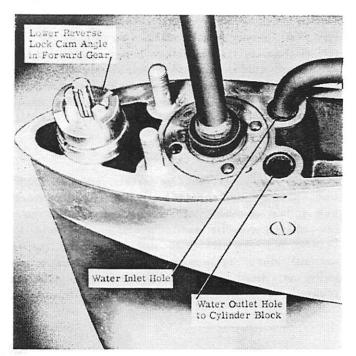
Assembly, Upper and Lower Reverse Locking Cams, 4-Cylinder 35-Plus HP Engines
